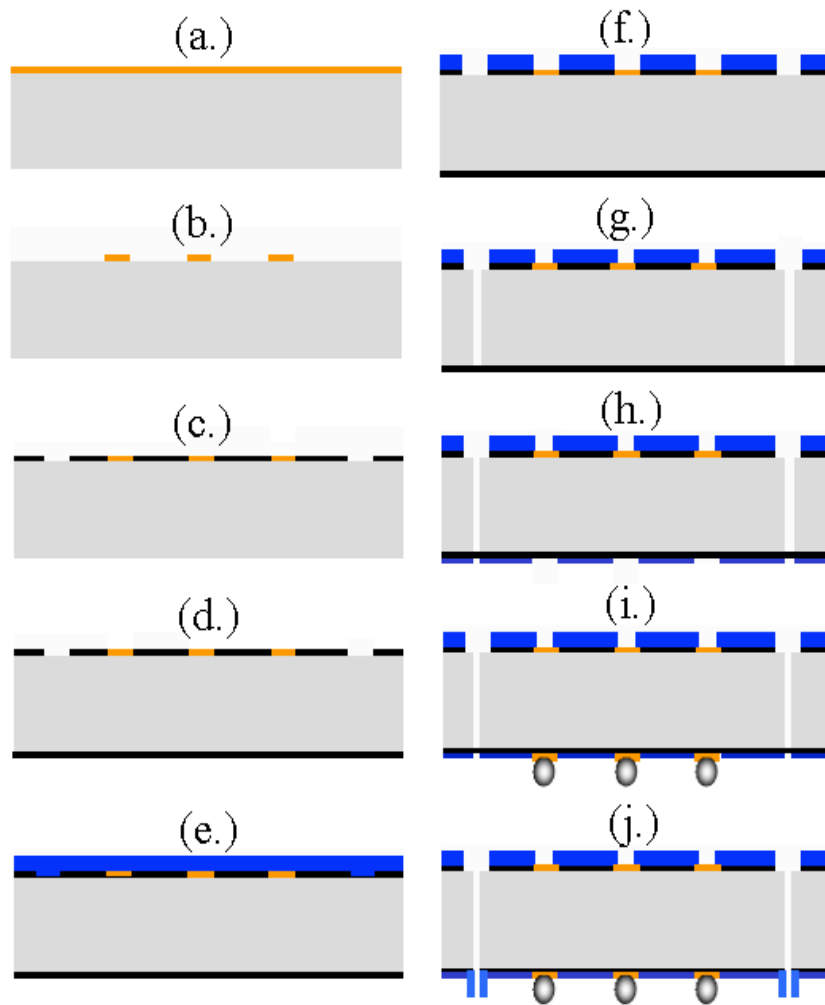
Schematic of wafer-level integration of polymer sockets, electrical I/O and fluidic I/O interconnects for a 3D flip-chip package.
